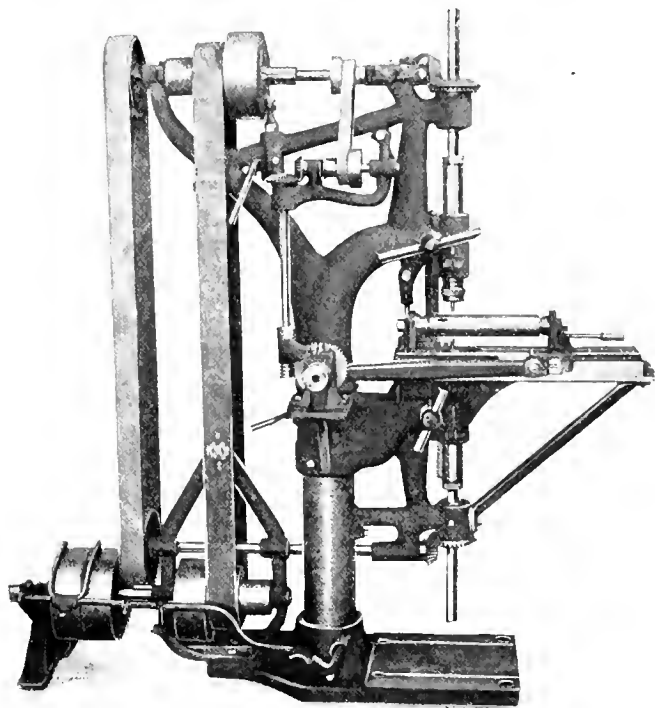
Routing Machine for Key-slots, showing Table Reciprocating Mechanism.
